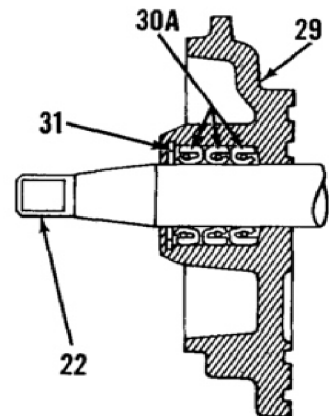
On model 4200 tractors, power steering pump is fitted with three shaft seals (30A) instead of single seal (30-Fig. 7) used on other models. Lips of two inner seals face inward, outer seal lip is toward retaining snap ring (31). Pump front cover is (29); drive shaft is (22).
